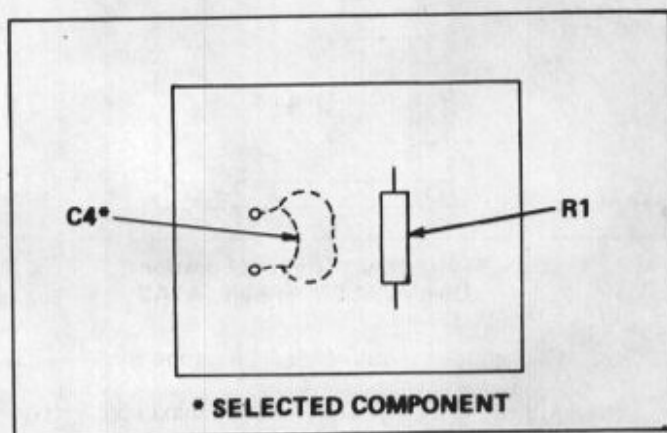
Trimmer Location, Amplitude Modulator Assembly, A27
